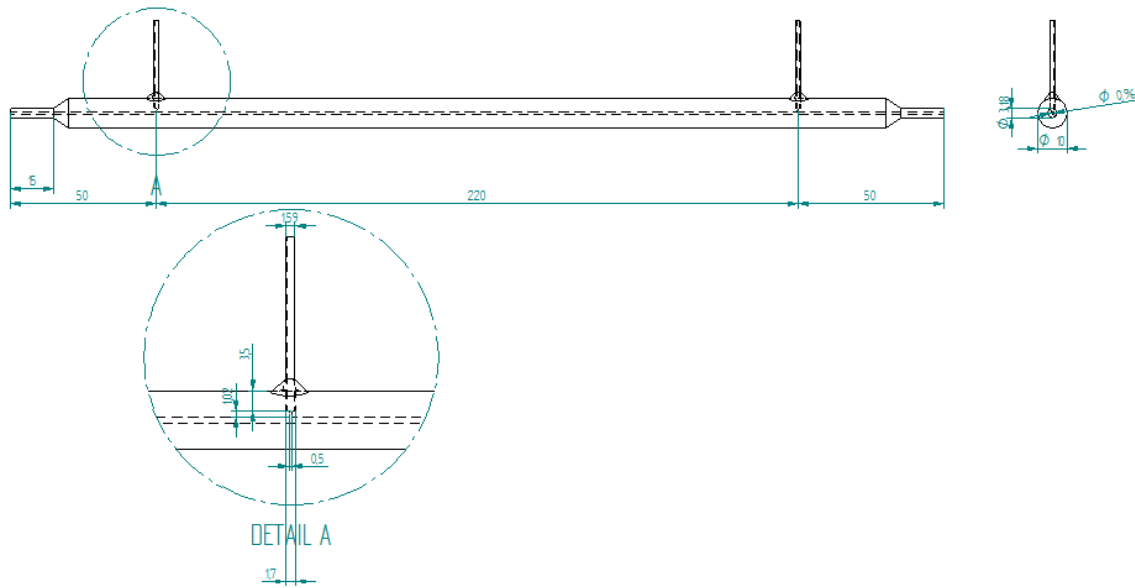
Sketch of the 0.96 mm inner diameter circular test section. Dimensions are in mm.
